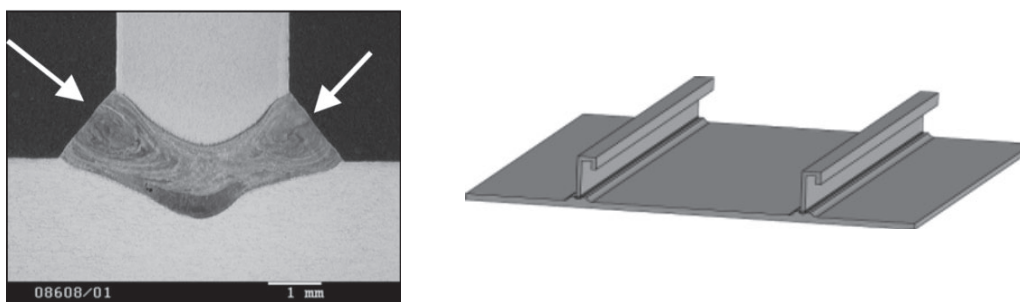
Laser beam welding of skin-stringer joints for aircraft fuselage applications
